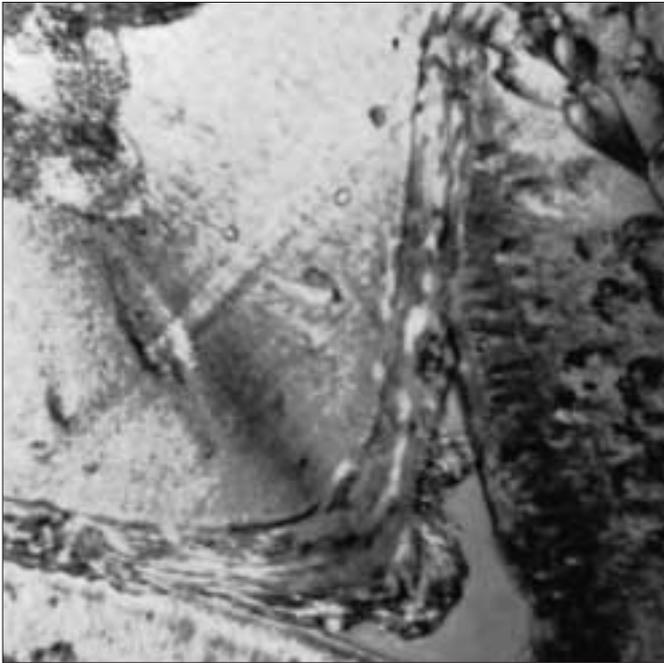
Microtome of badly welded V-groove
